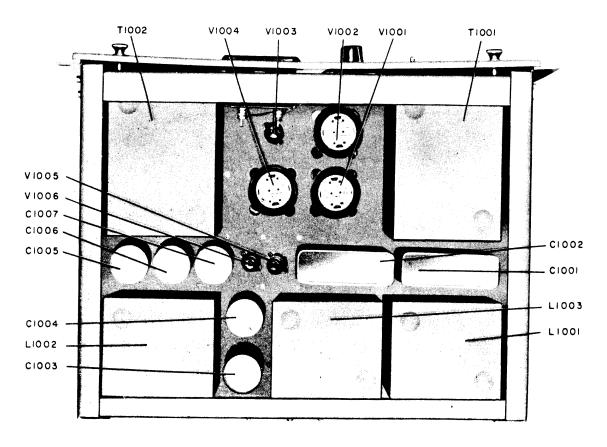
P wer Supply PP-454/FRT-5, Cas R moved, Top Vi w, L cati n of Parts
